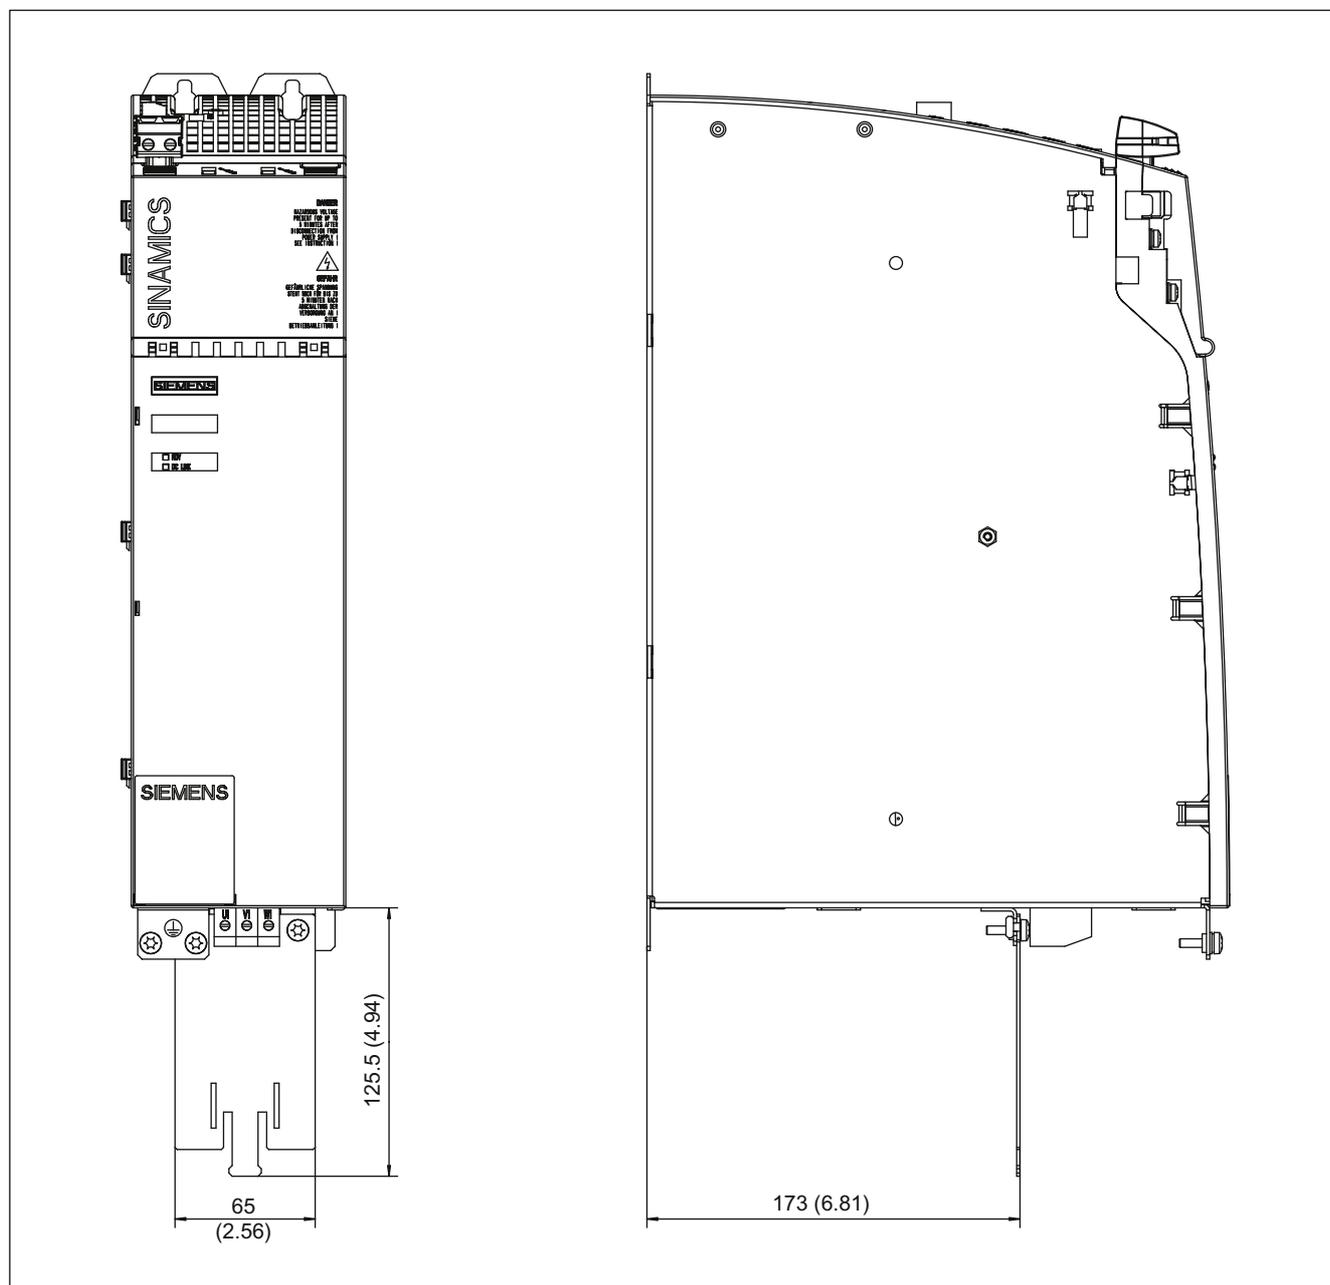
Dimension drawing of shield connecting plate on a 100 mm component with internal air cooling, all dimensions in mm and (inches)
